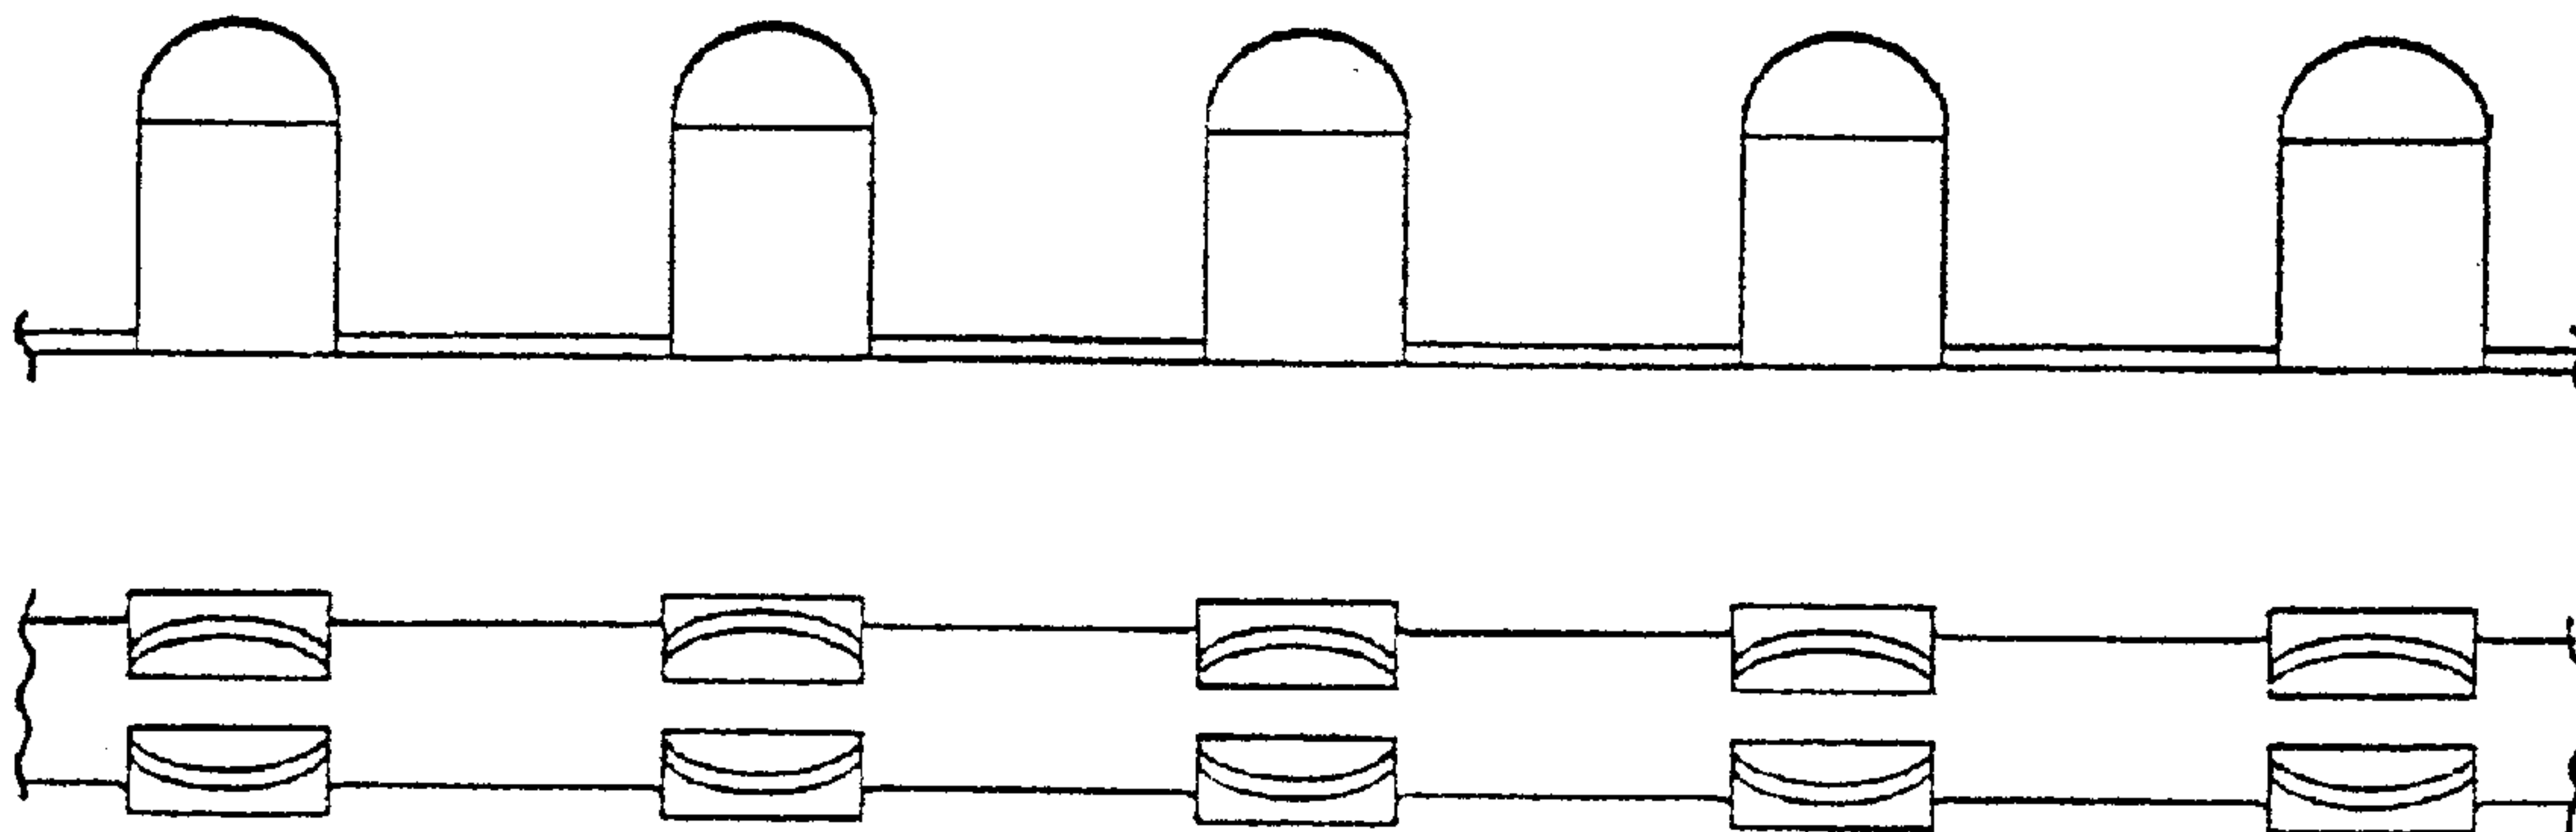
is a right side view, the left side view being a mirror image thereof.
